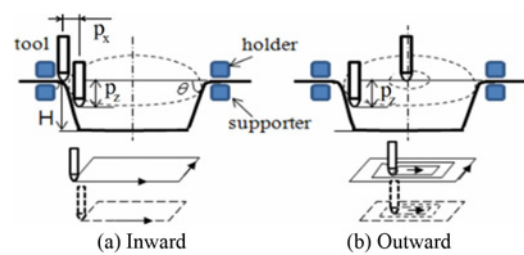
Schematic view of the SPIF process for two tool paths: (a) inward movement of tool path, (b) outward movement of tool path
